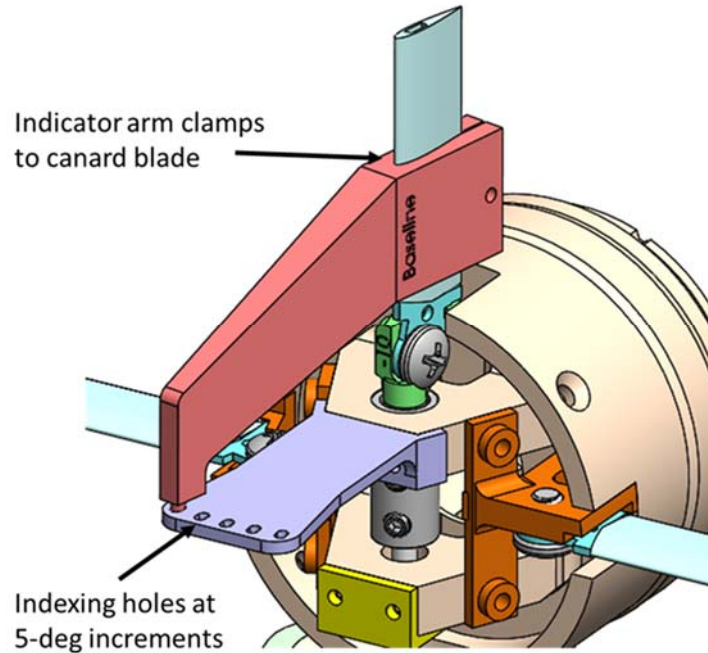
Indicator arm used to verify the canard deflection angle set using the axle flats
